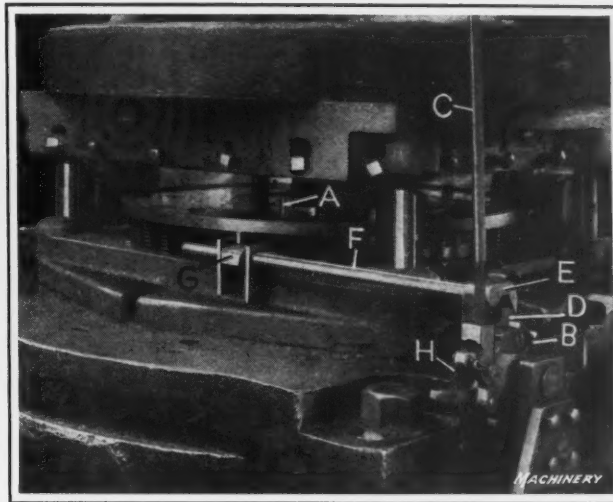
Front View of Machine shown in Fig. 23, showing Automatic Stop that functions after the Strip has been completely used
